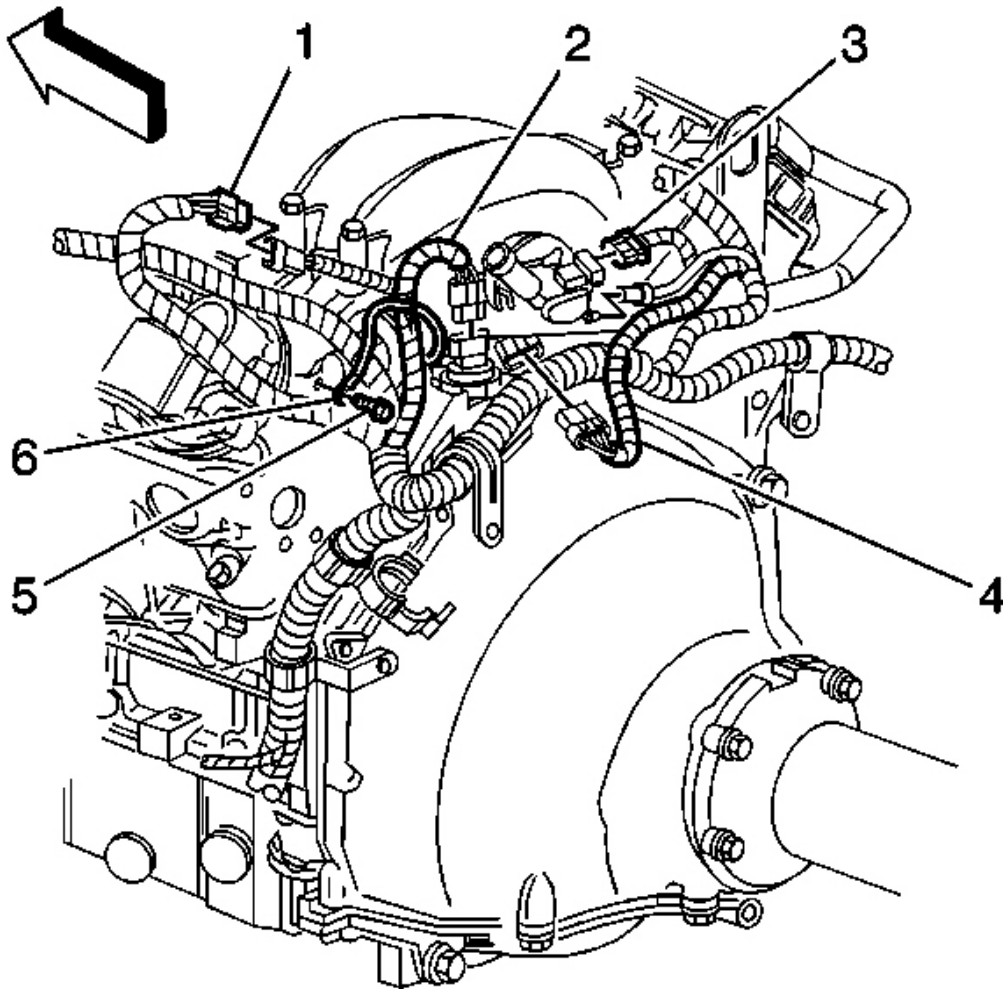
MAP Sensor Vacuum Hose & MAP Sensor Electrical Connector
